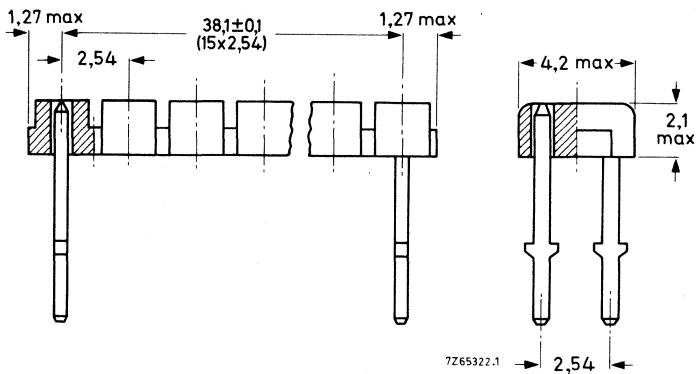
Removable mounting strip with 2 x 16 contact pins. For pin dimensions see Fig. 2.
